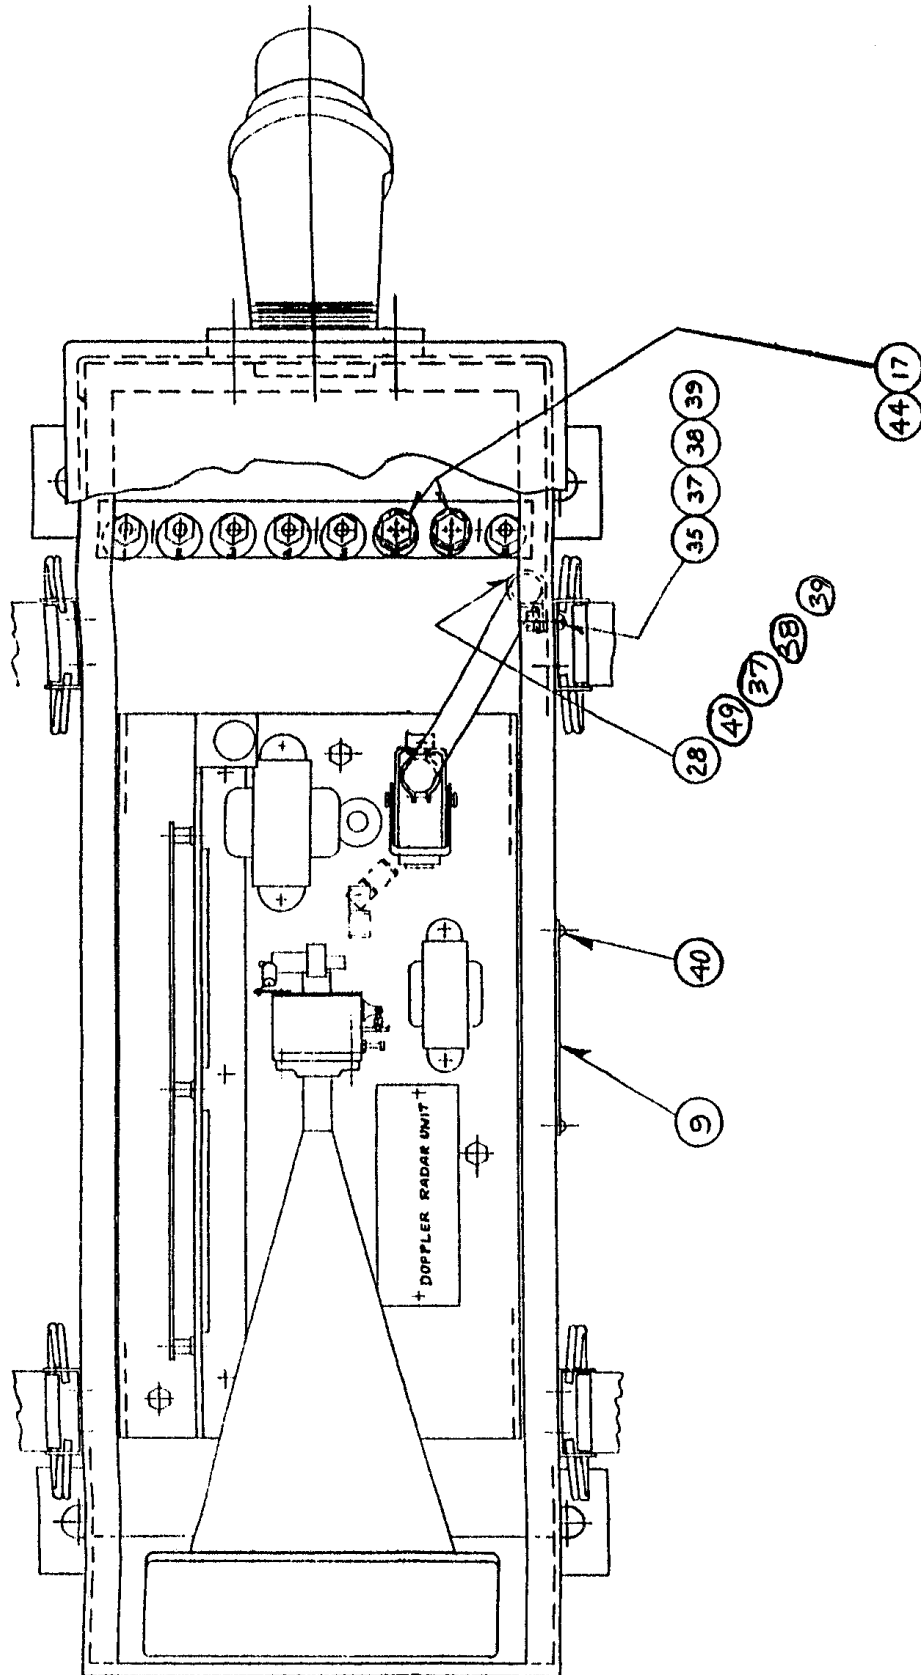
(a). DR-50 Radar Main Assembly Parts Location.
